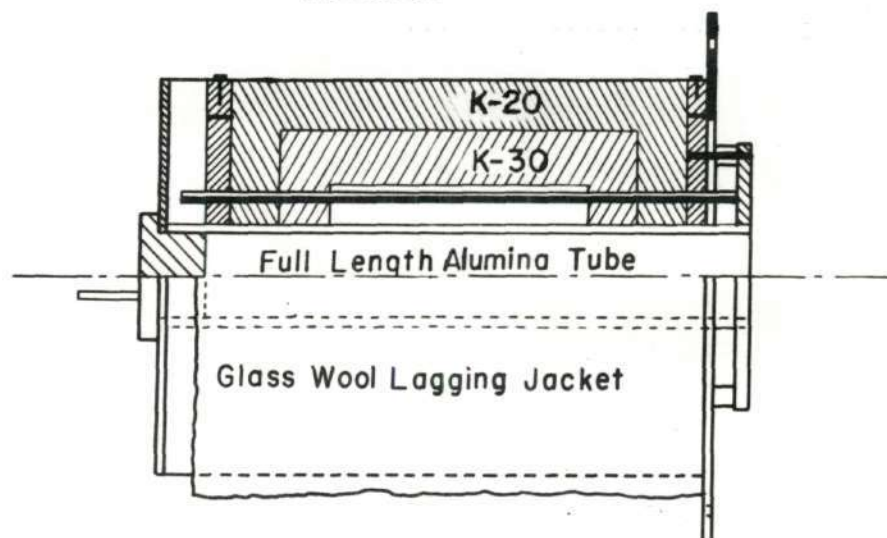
DETAIL OF GLOBAL FURNACE CONSTRUCTION HORIZONTAL & VERTICAL SECTIONS
